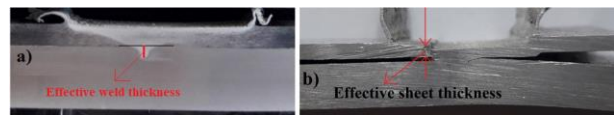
Representation of measuring effective weld and sheet thickness
